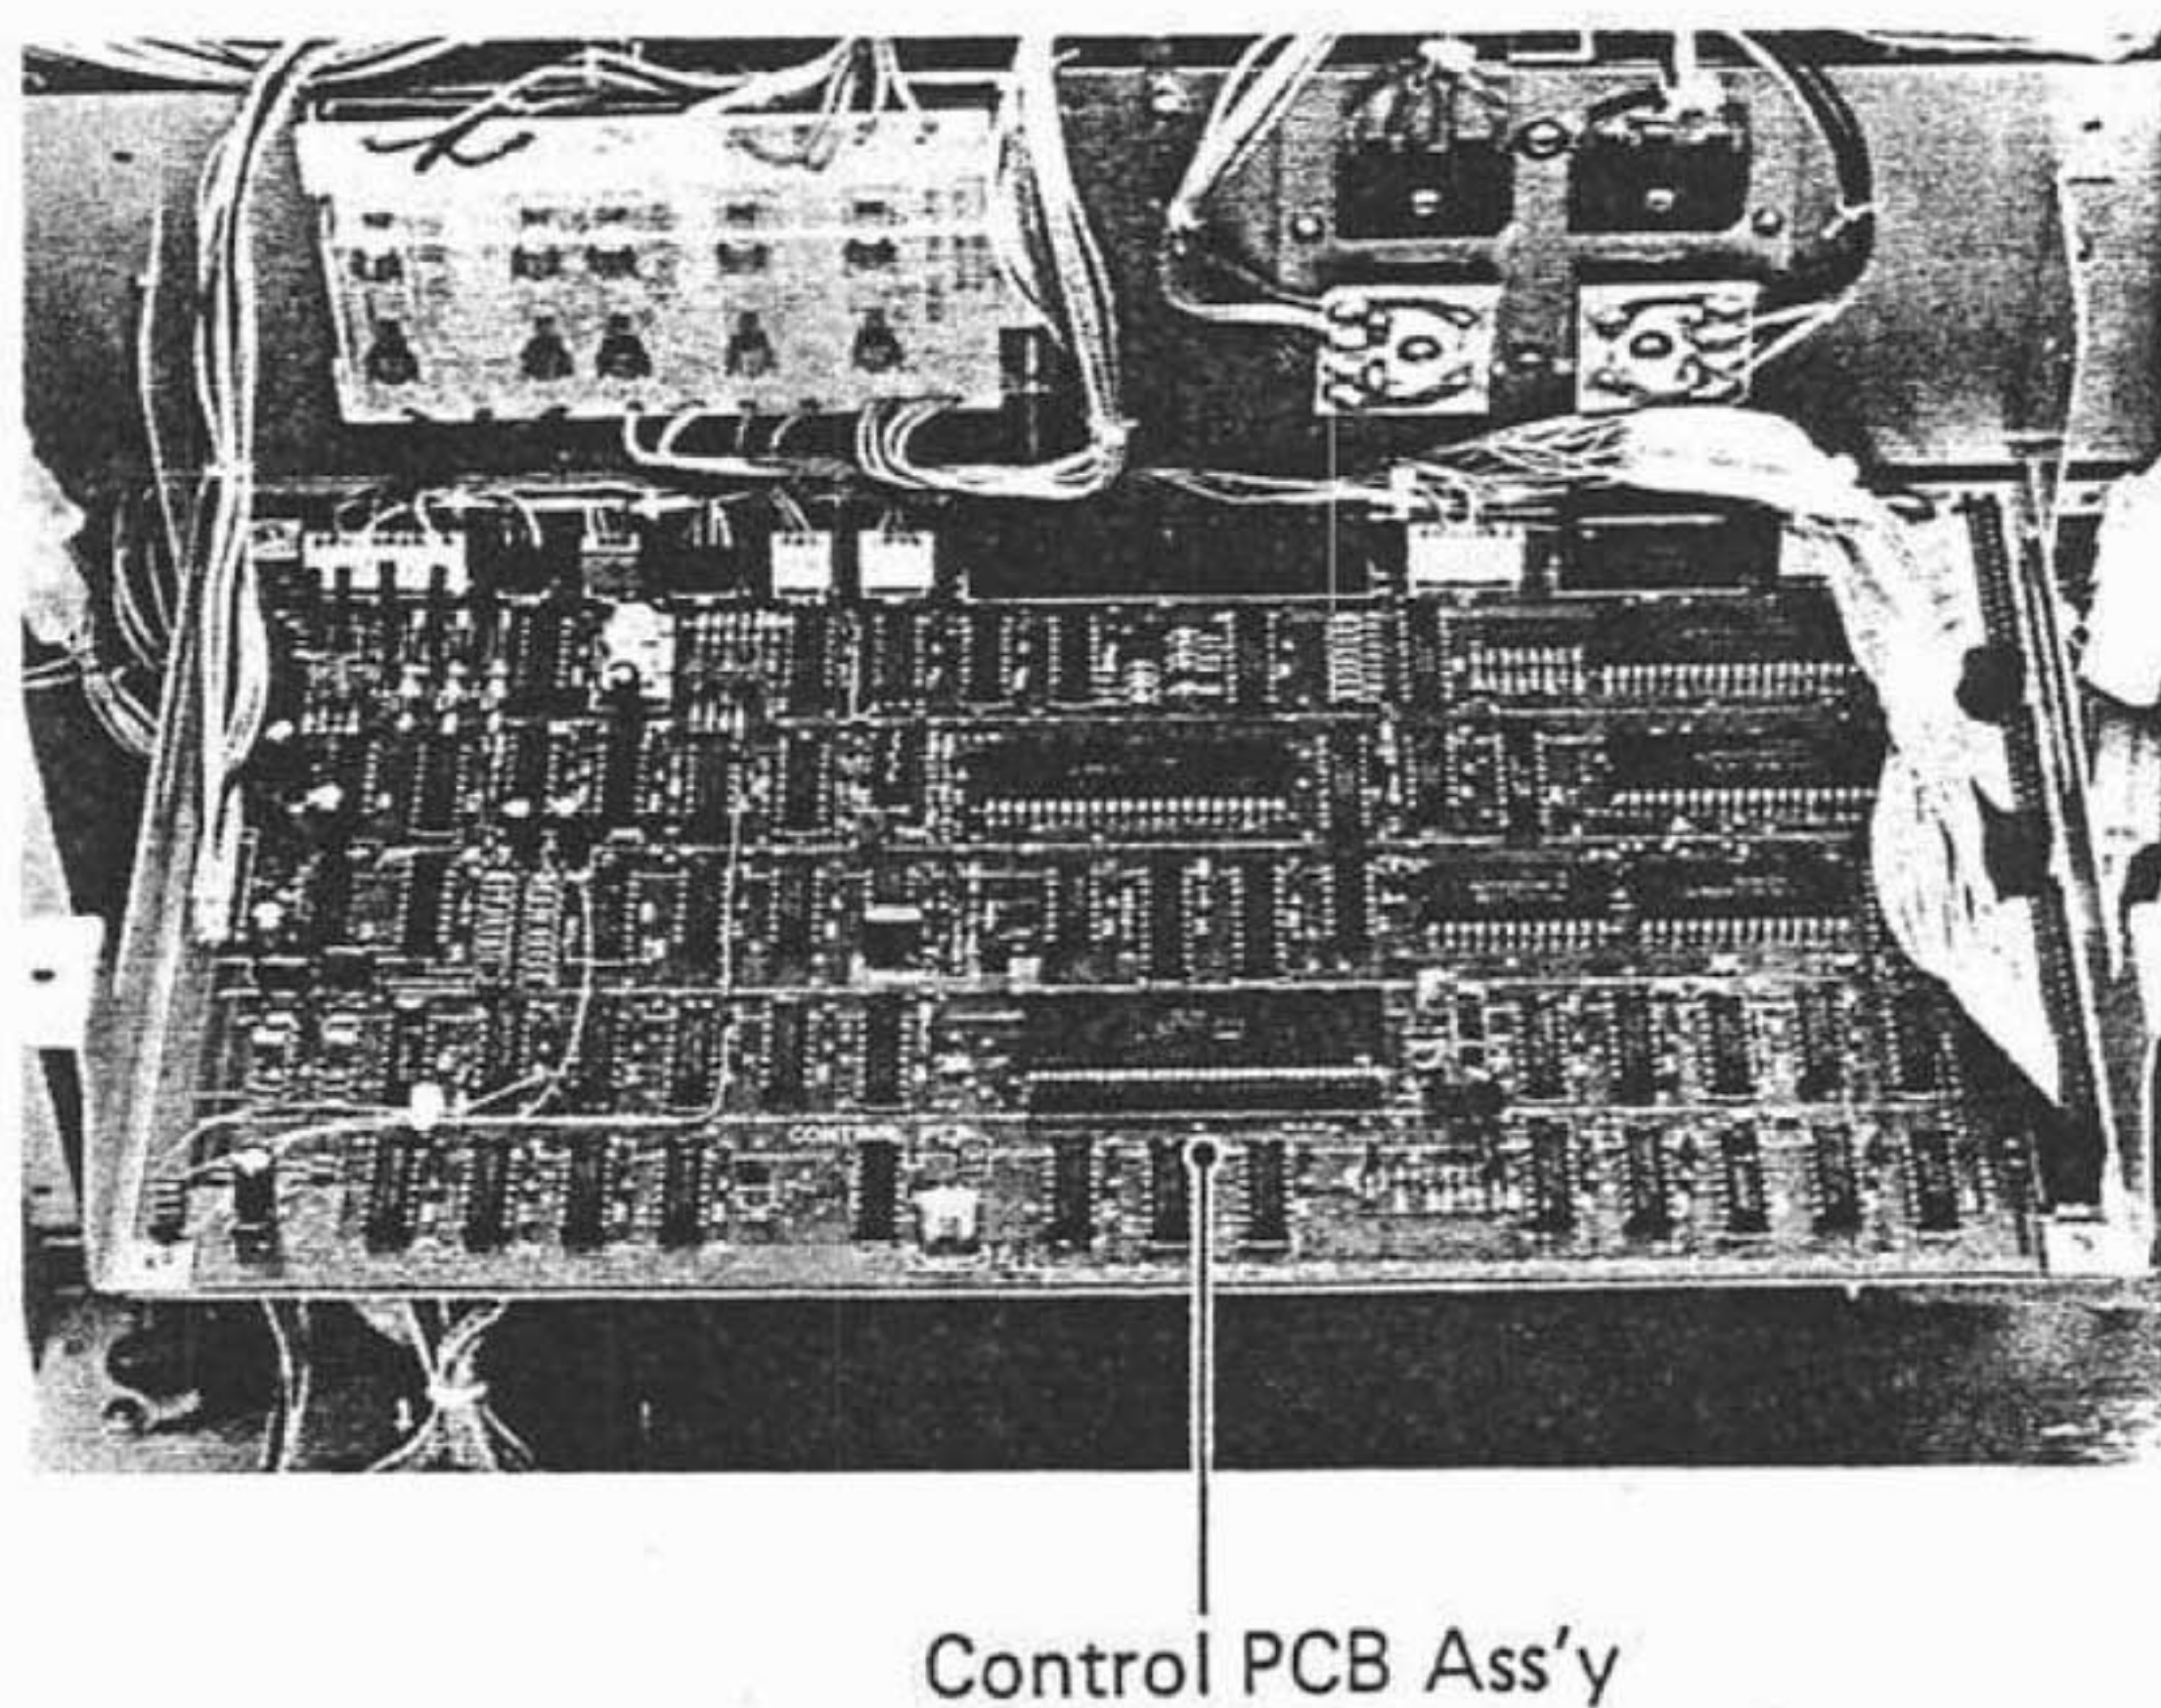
CONTROL PCB PULLED TOWARD YOU
